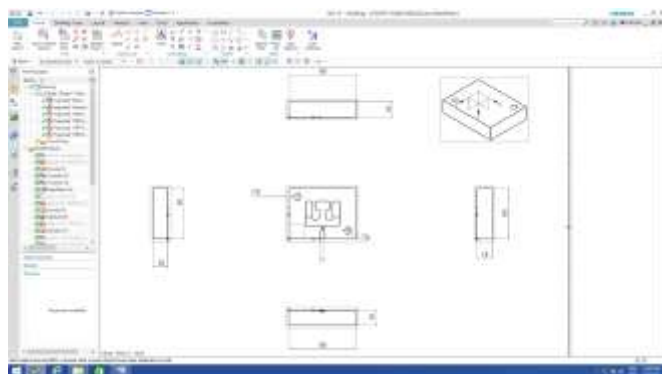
Dimensional Design of Cavity Hand Mould Part
